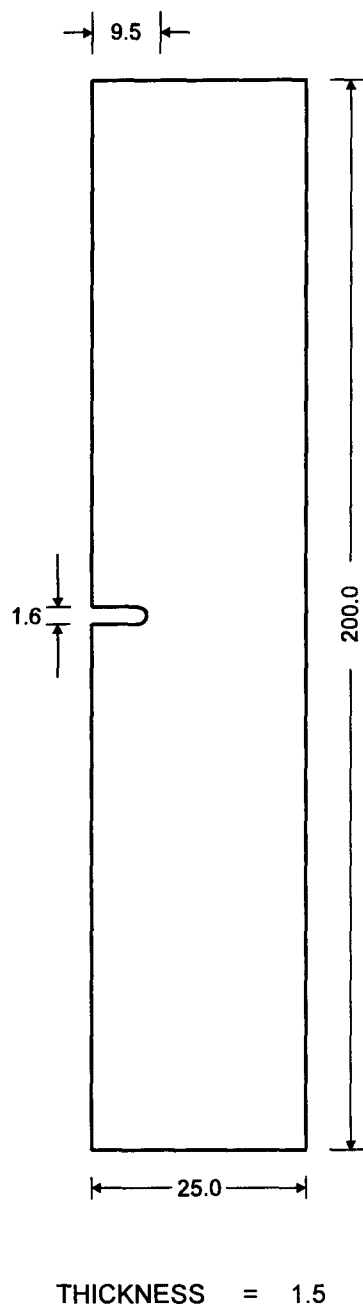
Fatigue test specimen geometry. Dimensions given in millimeters.
